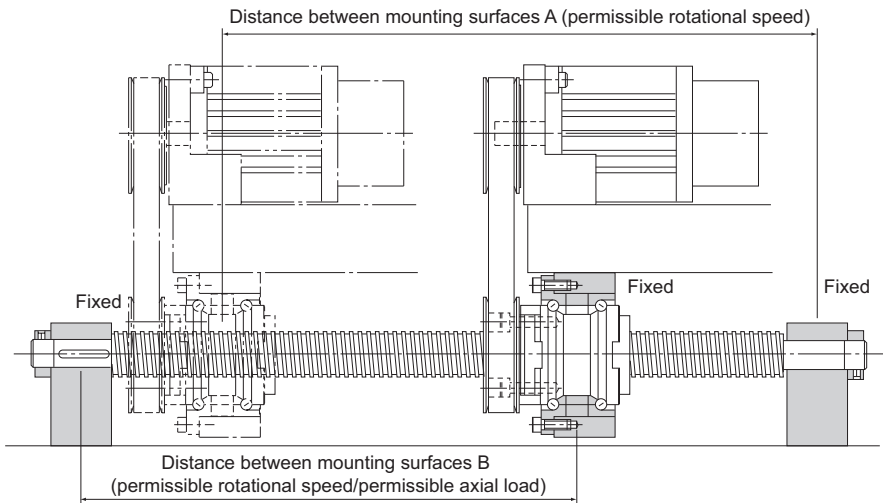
Screw Shaft Mounting Method for Rotary Nut Ball Screw: Fixed - Fixed
